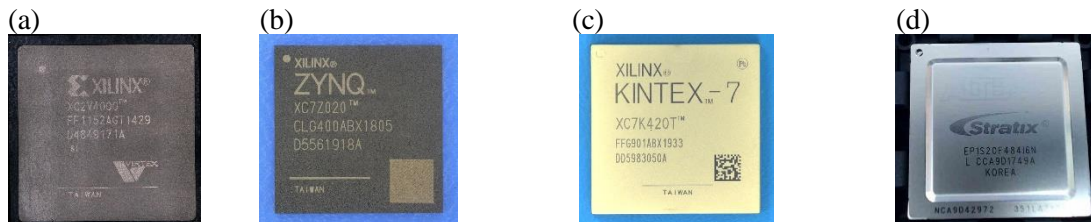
Photographs of FPGA parts. (a) re-marked (51) lid, (b) 2D bar code has been abrasively removed, (c) KINETX-7 package with 2D bar code (fake parts) and Stratix that passed visual inspection and all electrical tests but failed C-SAM).
